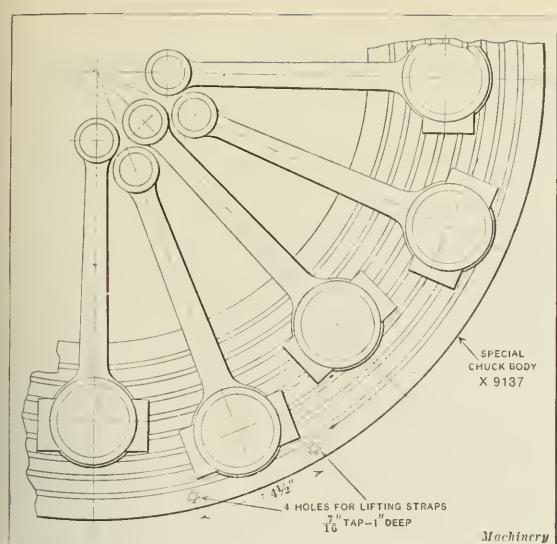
Arrangement used in holding Connecting-rods for grinding Sides of Bearings
